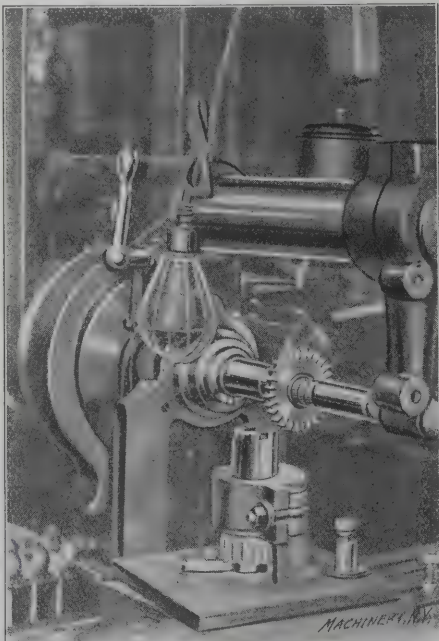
Milling Clutch Teeth in the Drive-shaft End of the Sleeve
